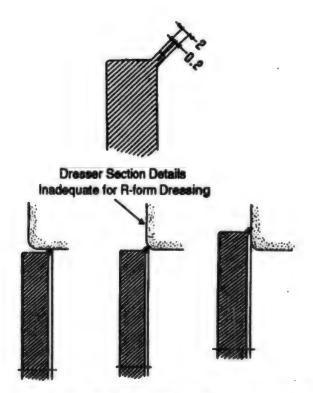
Throughing and Dressing of Wheel Front and Side Surfaces
